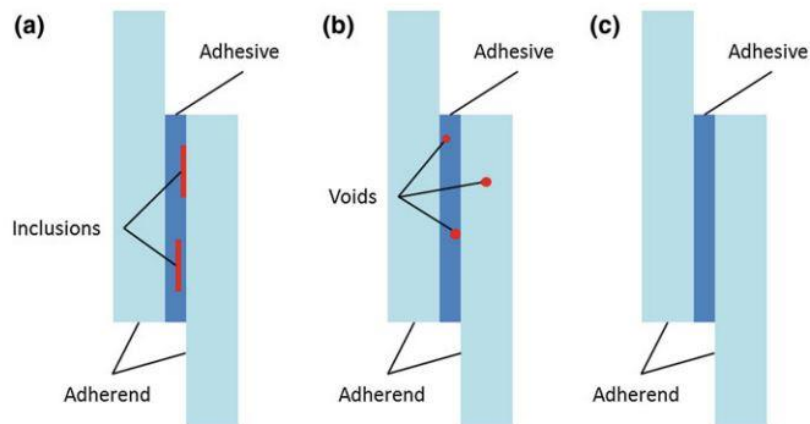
Types of defects observed in adhesive joints; a) inclusions, b) voids and c) kissing defects [19]
